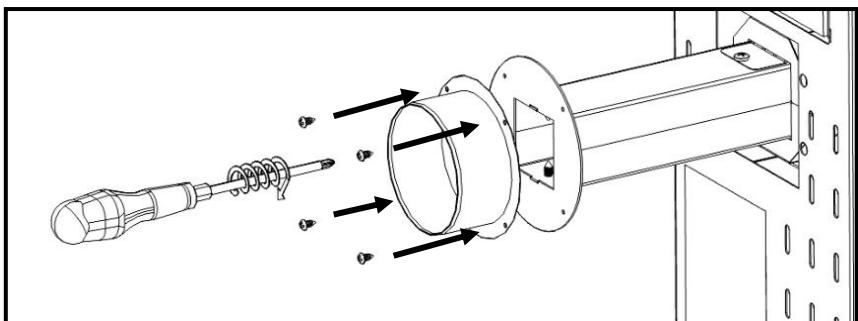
Securing the air outlet duct to the free-standing fire unit
